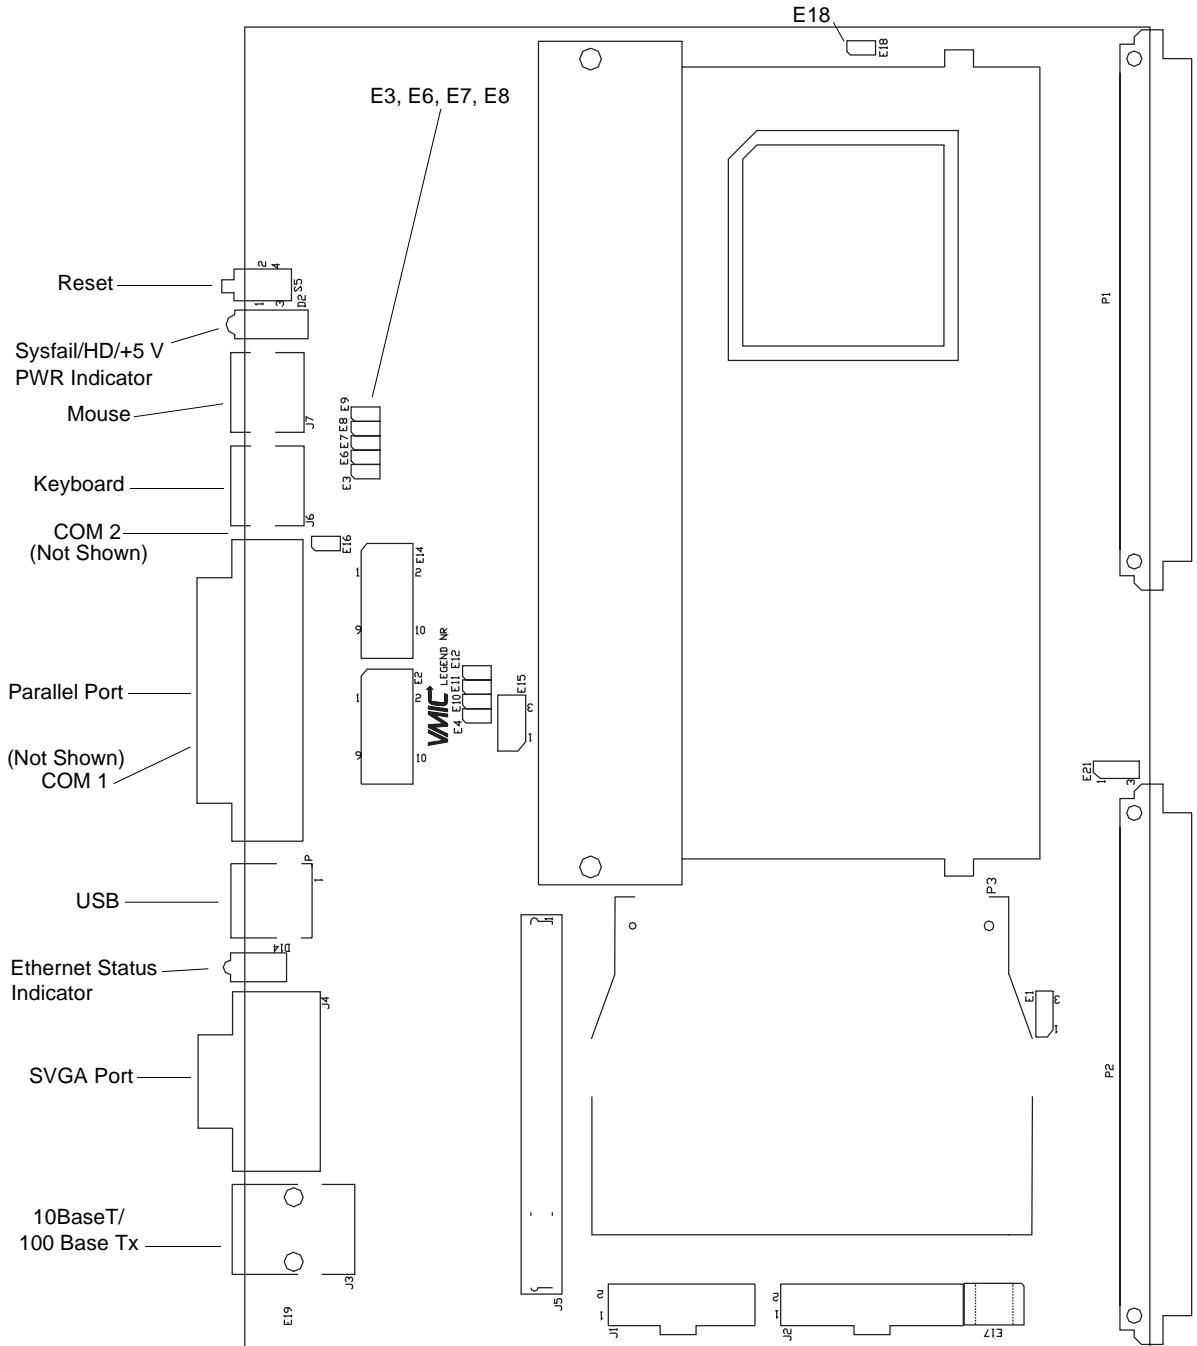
VMIVME-7697A CPU Board, I/O Port, and Jumper Locations
